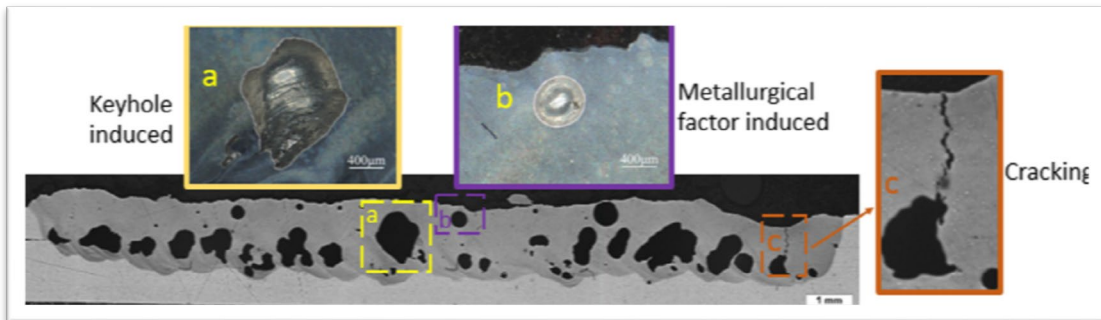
Pictures of weld porosities in laser-welded Al joint's cross section
